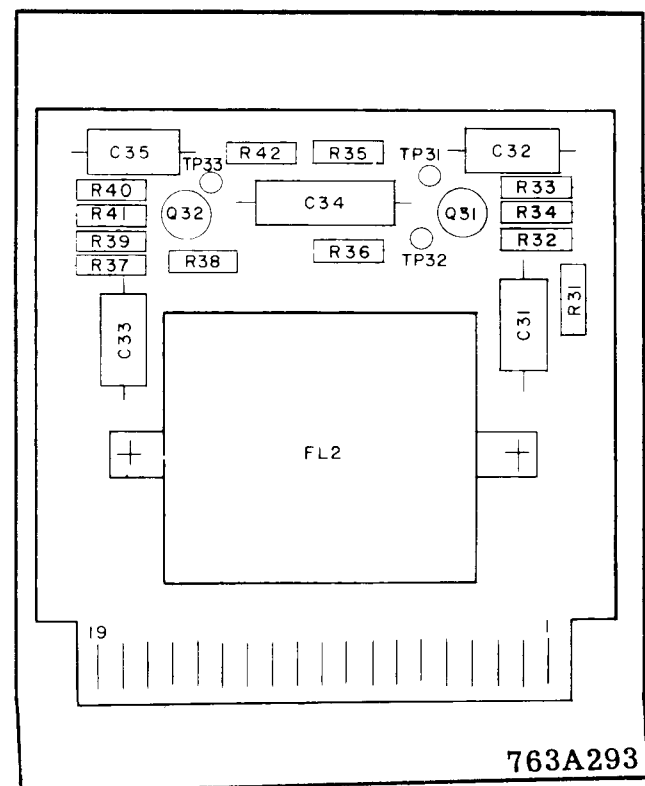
Component locations on the I.F. amplifier printed circuit board.
